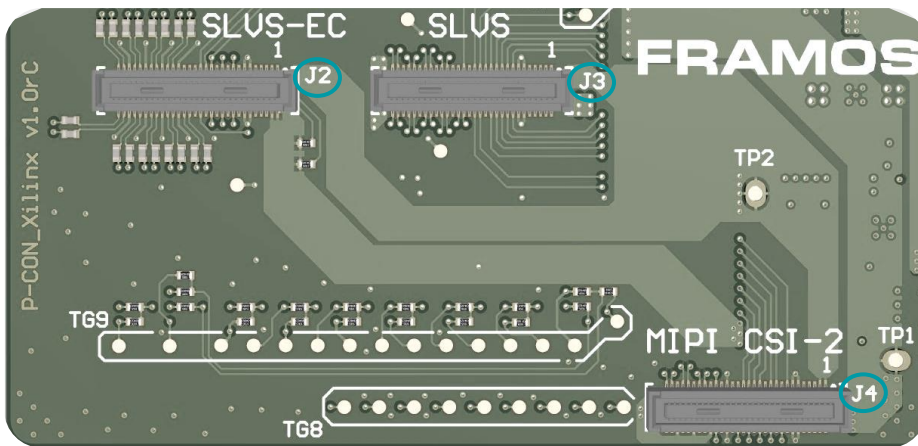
Technical Drawing of FPA-2.A/96B-V1
